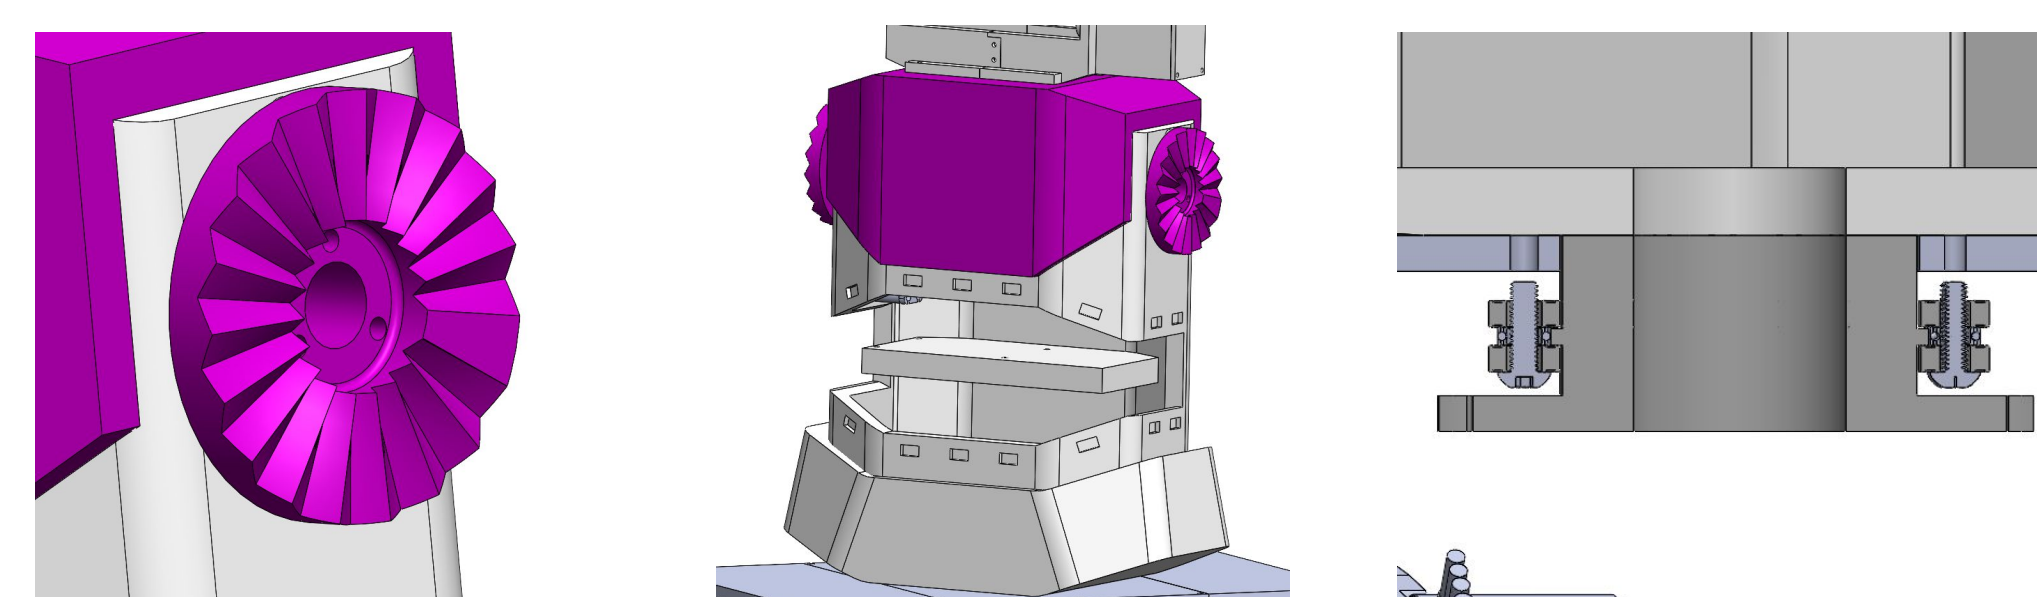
(Left) Shoulder Gear, Figure 7. (Middle) Expanded Torso, Figure 8. (Right) Turret Mechanism
